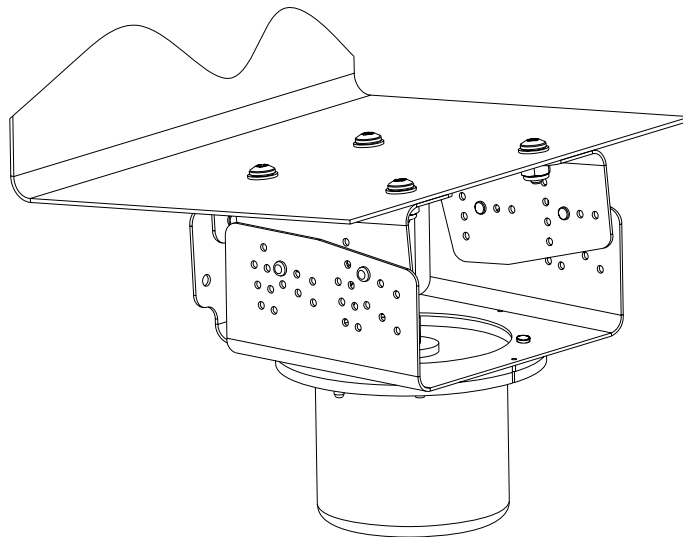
GMU 44 Universal Mount, Bottom Plate Mounted - Suspended
